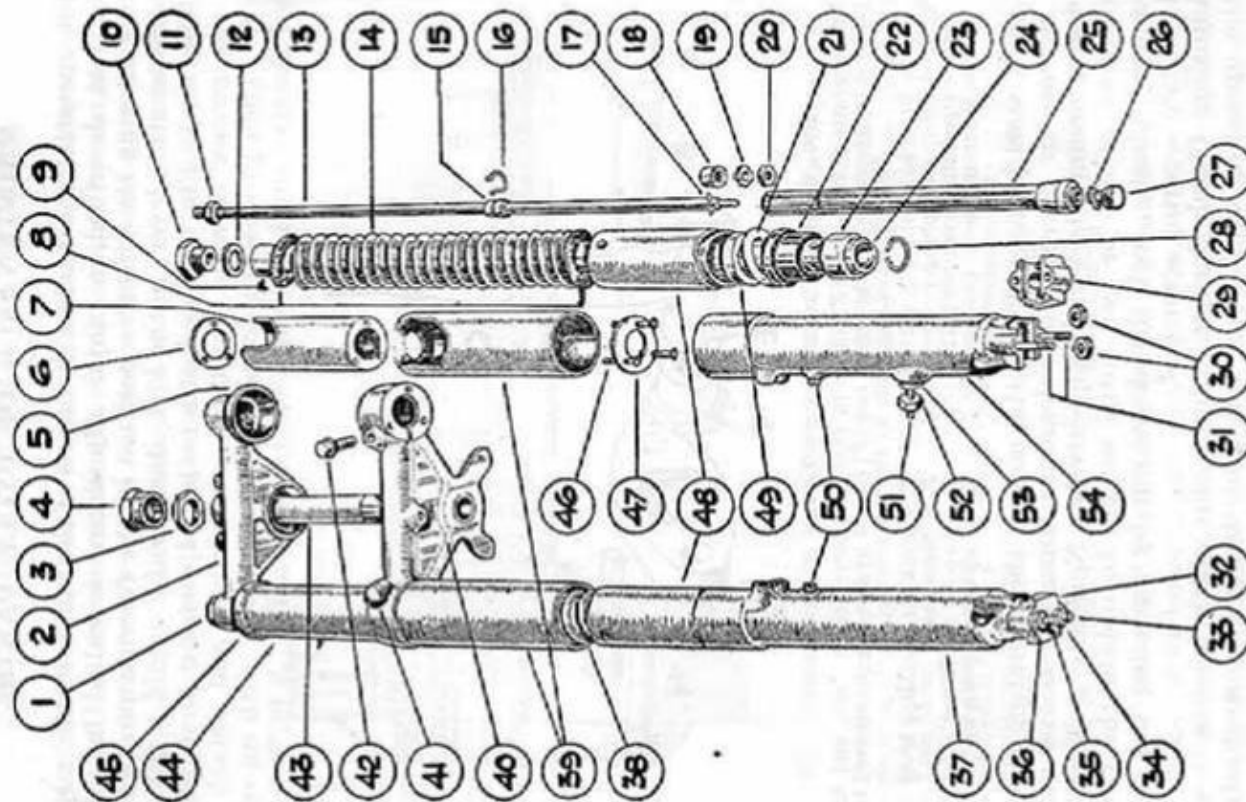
SHOWING STEERING HEAD ADJUSTMENT AND DETAILS OF 1945-7 "TELEHYDRAULIC" FRONT FORKS
